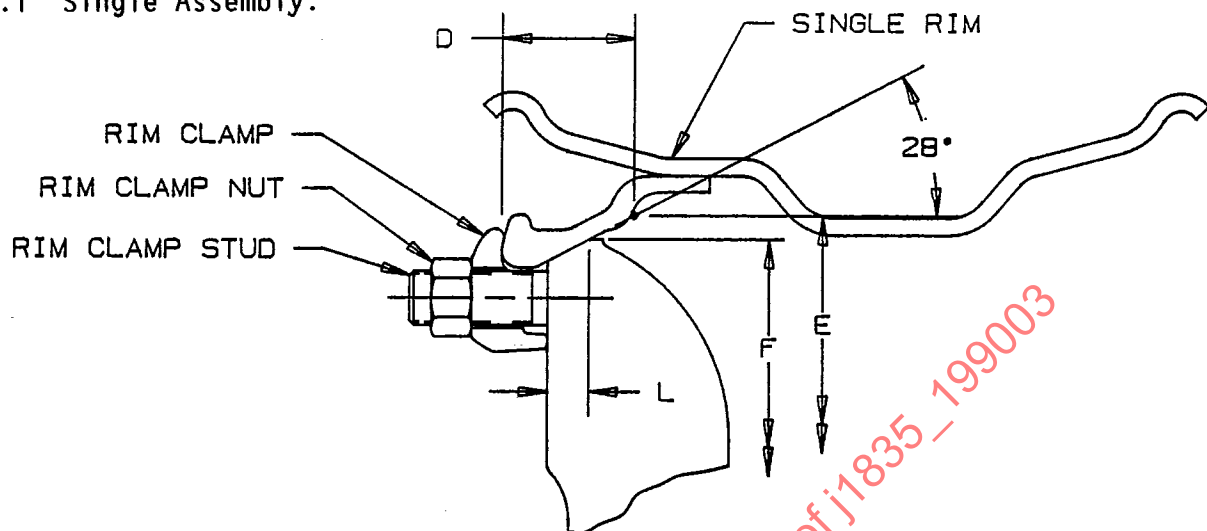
Single Assembly, Drop Center Rim Shown
